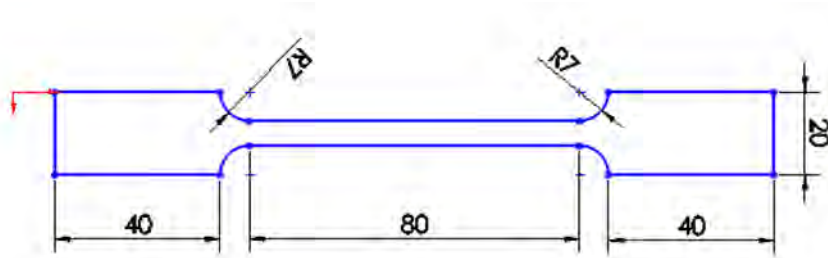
Dimension of tension test un-notched specimens. All dimensions in millimeters.
